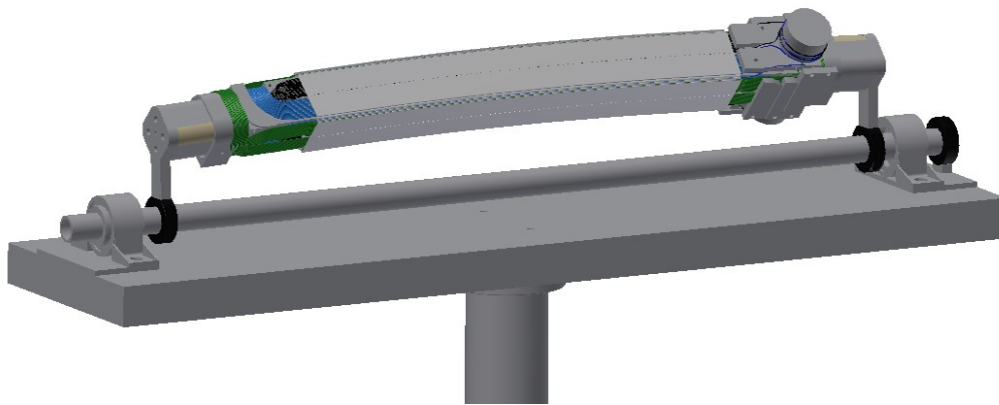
CAD drawing of the BTC mounted on the winding table.
